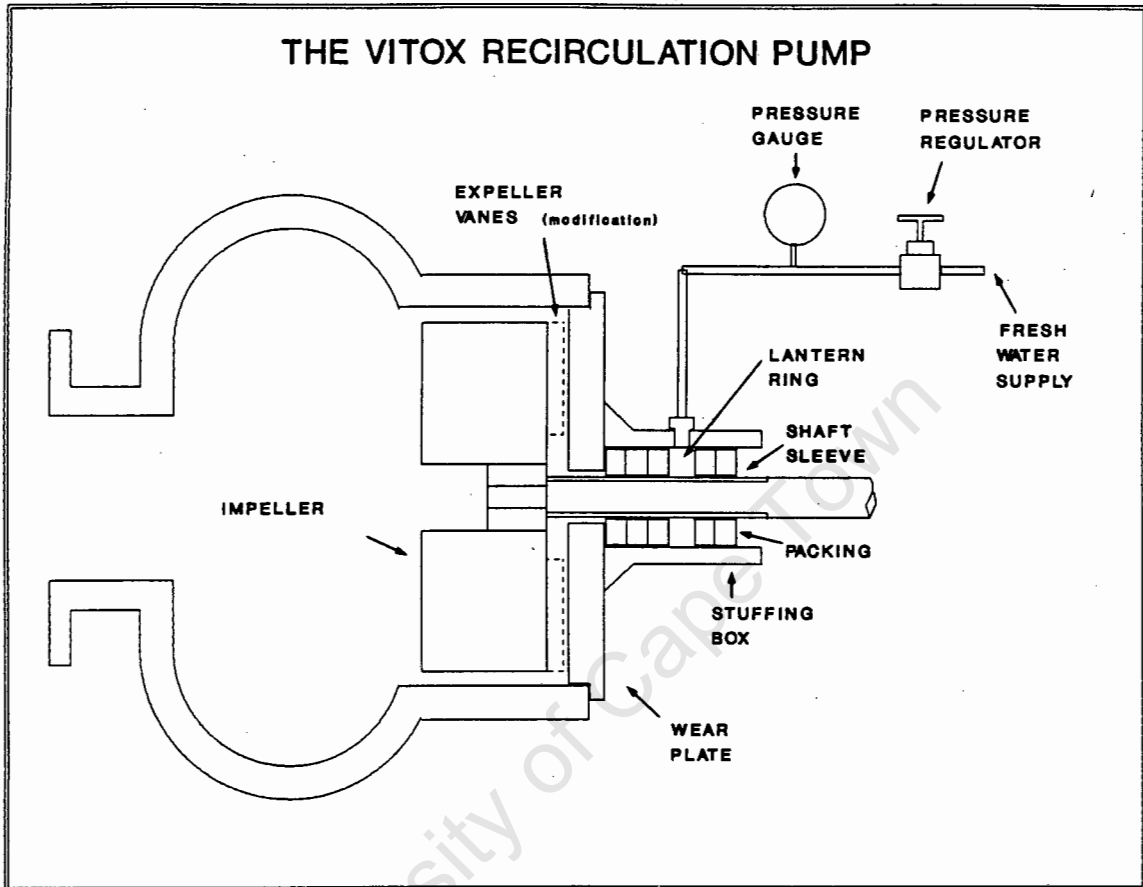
B.6: A section through the Vitox recirculation pump which illustrates how shaft sleeve wear was overcome by (1) welding expeller vanes to the back of the impeller shroud and (2) by fitting a fresh water gland cooling and lubrication system.
